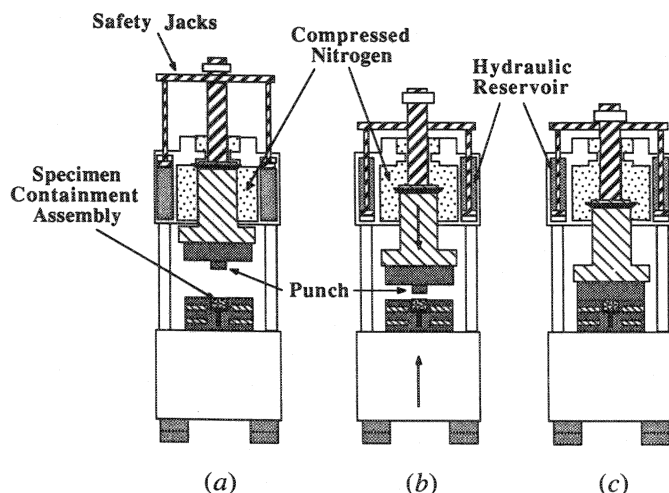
Sequence of events leading to dynamic compaction in Dynapak machine: (a) punch blocked by safety jacks, (b) machine in ready position after lowering of safety jacks, and (c) piston as it accelerates toward specimen containment assembly.
